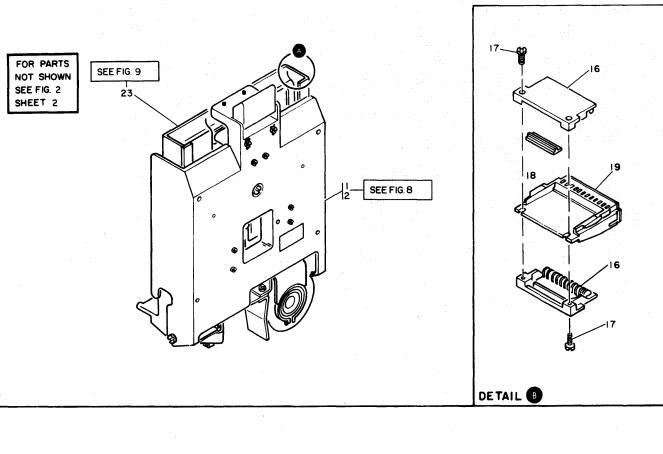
PRIMARY POWER ASSEMBLY. SEE LIST 6.
